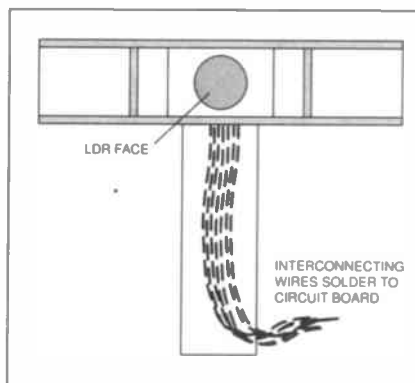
Sideways view of the l.d.r. sandwich assembly.
